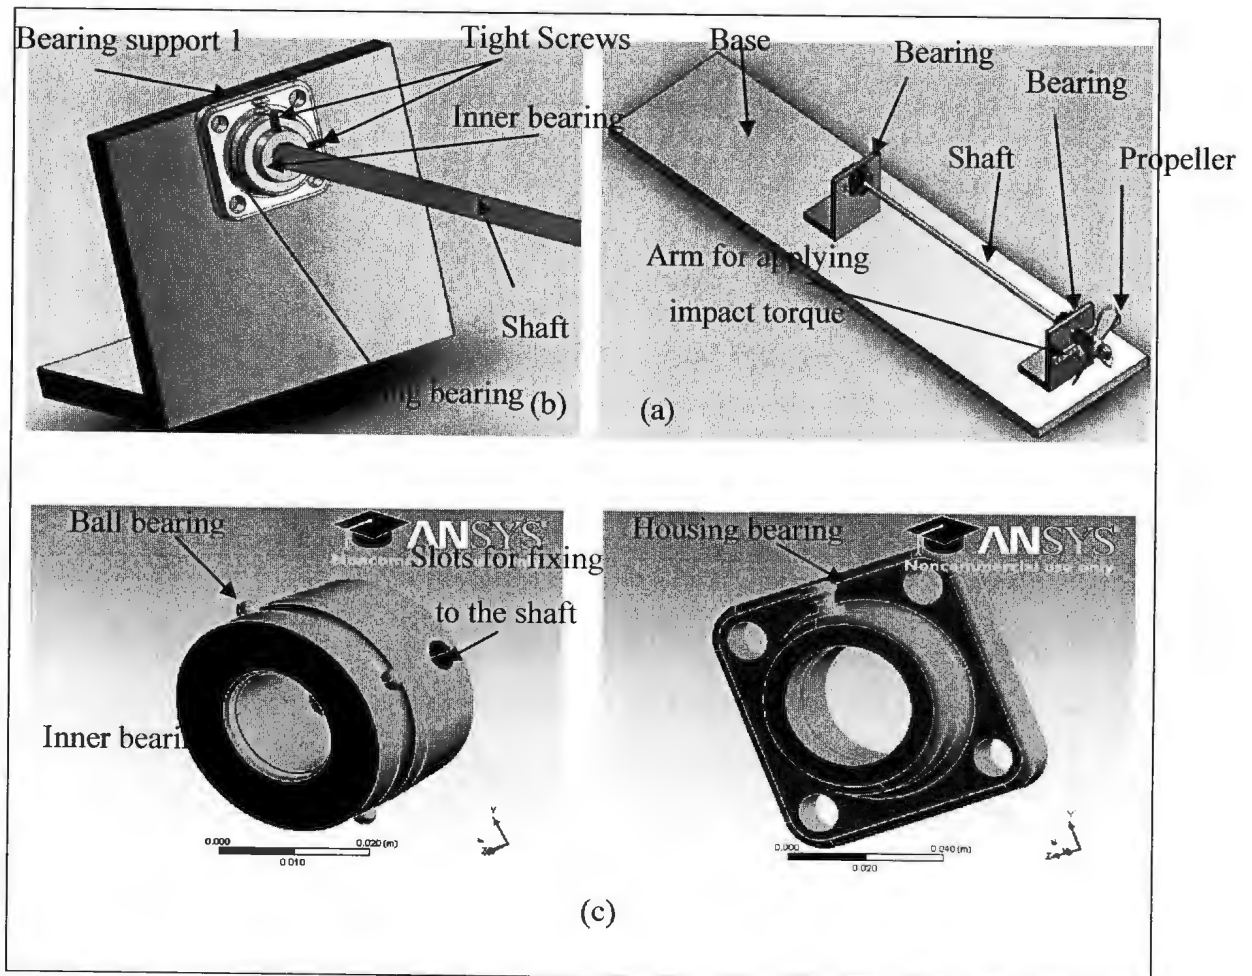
a) Details of Bearing Support; b) Schematic Diagram of Shaft-Propeller-Bearing; and c) Inner and Outer Bearing.
